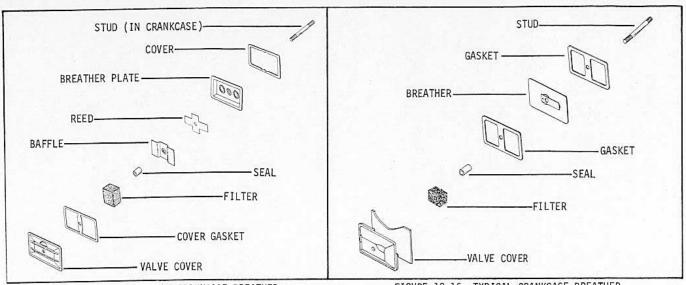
TYPICAL CRANKCASE BREATHER
